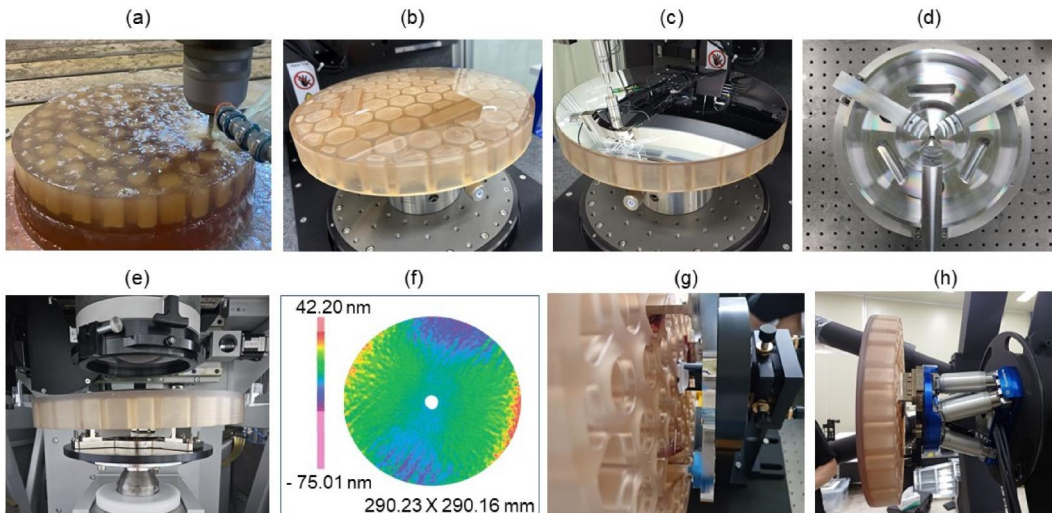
Fabrication and assembly procedures of the secondary mirror (M2). (a) Grinding of the lightweight mirror, (b) The lightweight M2 after the polishing, (c) The M2 after surface coating, (d) The assembling fixtures, consisting of the base and guiding fixtures, (e) Surface quality test by using Aspheric Stitching Interferometer (ASI) of QED TechnologiesTM. (f) The result for the surface measurement, (g) Aligning the flat mirror on the back of the M2, (h) M2 assembly installed on the OTA.
